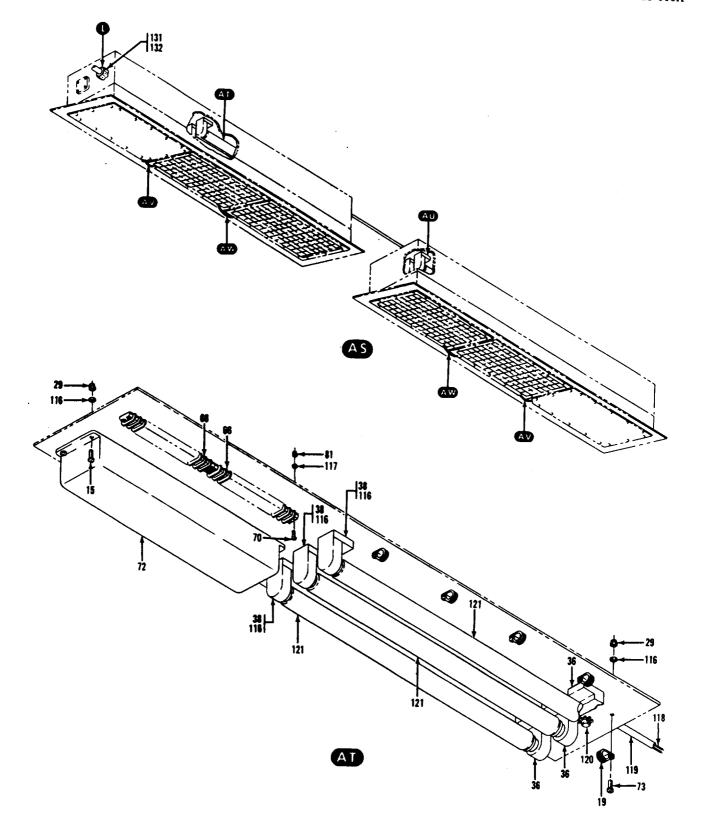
Electrical Equipment Installation (Sheet 14 of 19)
